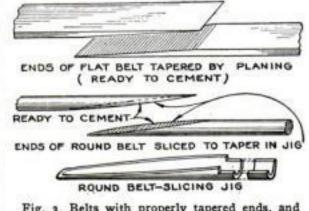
Belts with properly tapered ends, and a brass jig used for slicing round belts.
